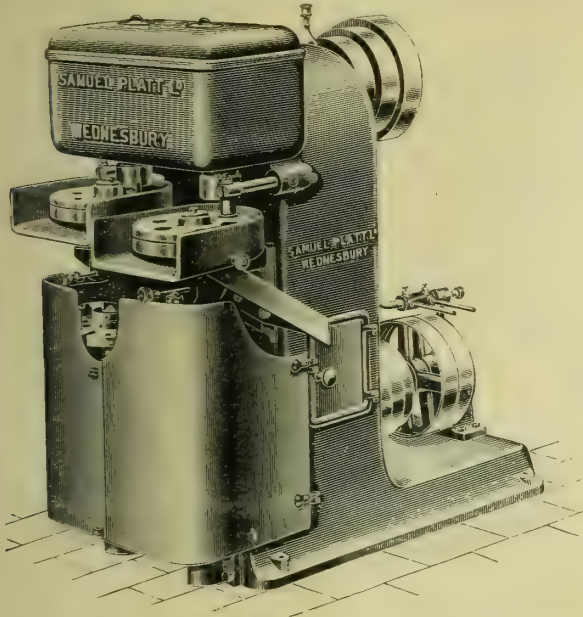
DOUBLE-SPINDLE NUT FRAIZING MACHINE. MESSRS. SAMUEL PLATT, LTD., WEDNESBURY.
